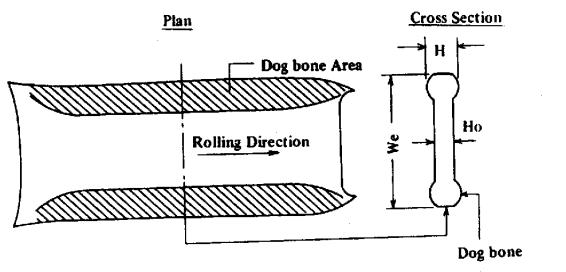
Plan and cross-sectional shape of a plasticine slab after edging.
